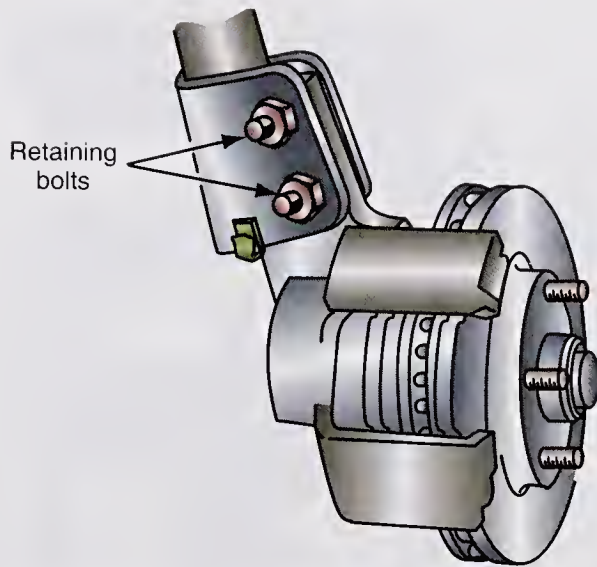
Removing strut-to-steering knuckle retaining bolts.
